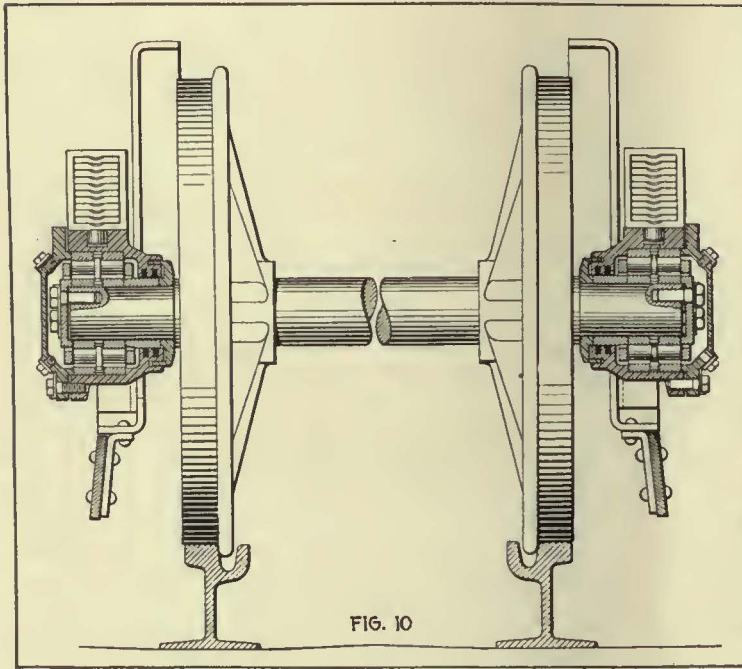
ROLLER BEARING OF FLANGE TYPE APPLIED TO RAILROAD JOURNAL BEARING BOX. FIG. 11—NORMA BEARING AS APPLIED TO RAILROAD JOURNAL BOX. ALTERNATIVE DESIGNS ARE SHOWN ABOVE AND BELOW THE CENTER LINE OF THE AXLE. FIG. 12—RIEBE-WERKE DESIGN OF TWO BEARINGS MOUNTED IN A JOURNAL BOX
